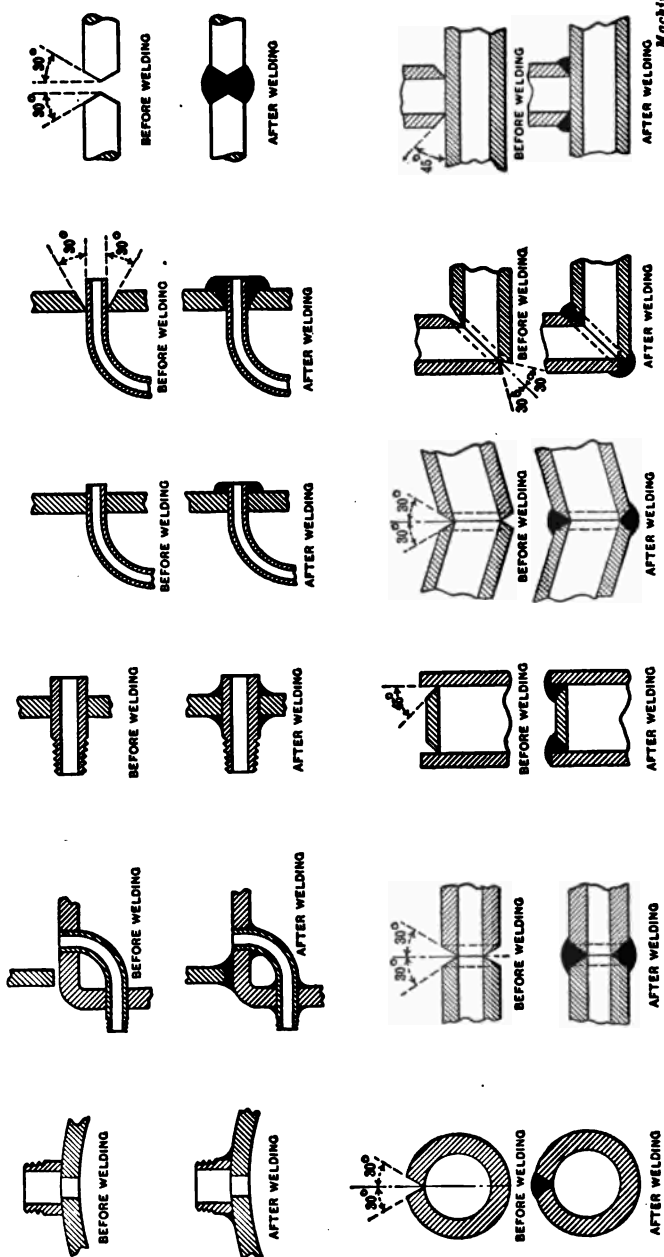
Methods of preparing Piping and Tubular Work for Welding
